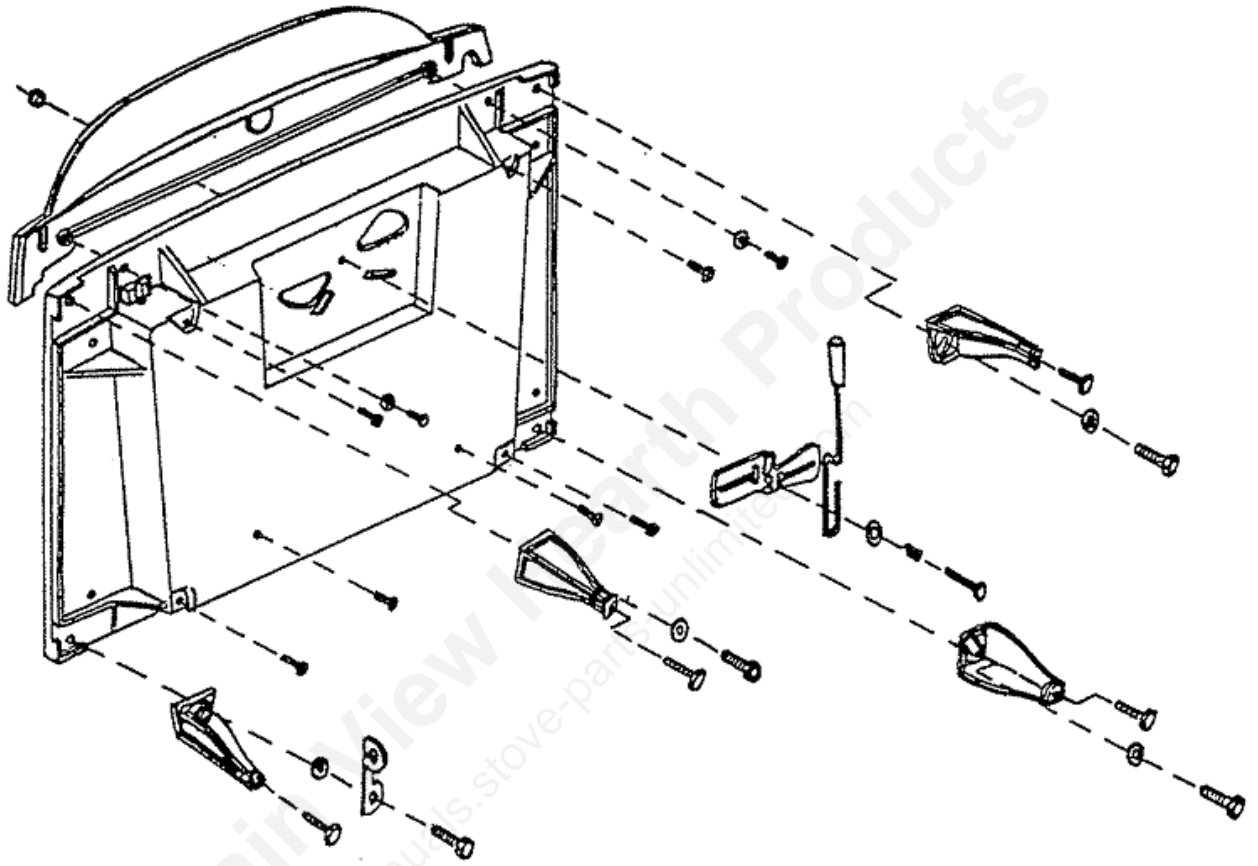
FRONT LOADING DOOR, INSIDE VIEW
